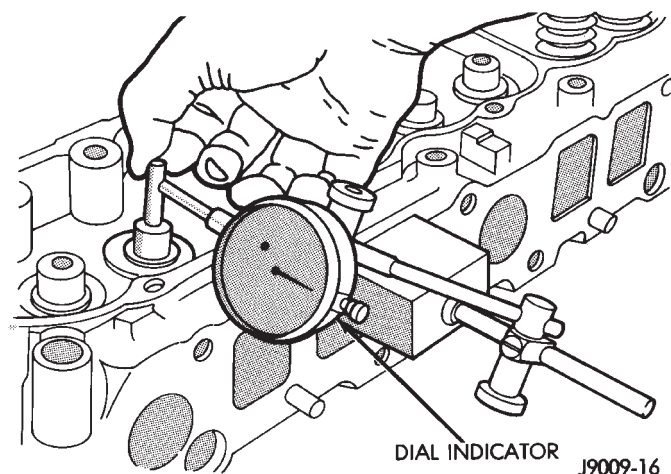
Measurement of Lateral Movement Of Valve Stem
